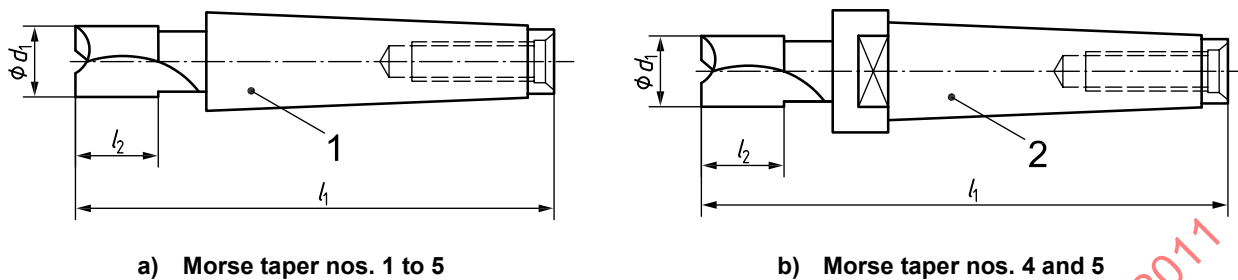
Dimensions of flat-ended end mills and ball-nosed cylindrical end mills
